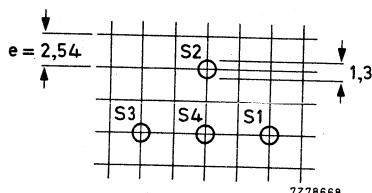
Hole pattern for mounting on a printed-wiring board (solder side).
